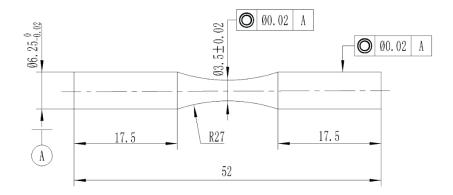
Fatigue specimen geometry (dimensions in mm)
